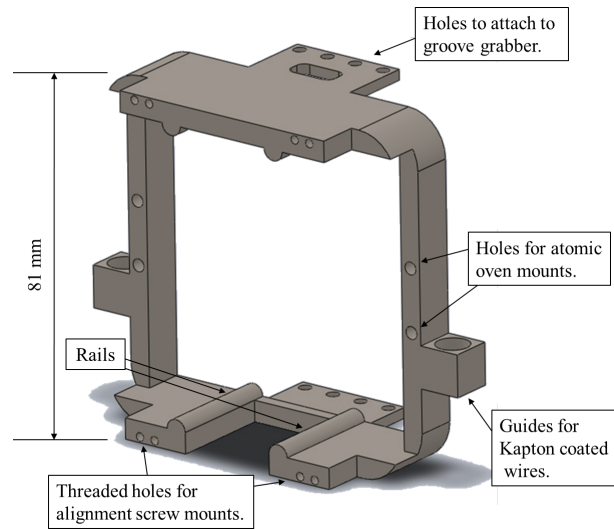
Drawing of the chip rail. It was machined from a single piece of aluminium.
